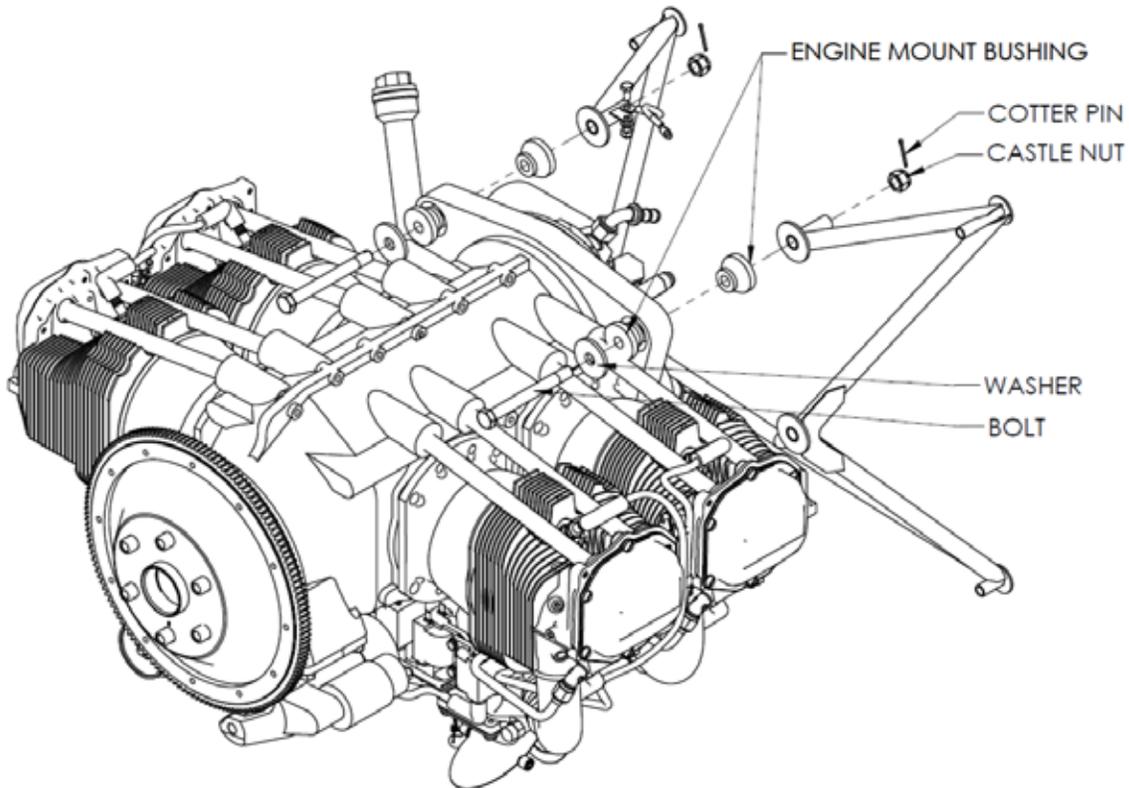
Engine Mount Assembly (Shown with CC340 Engine)
